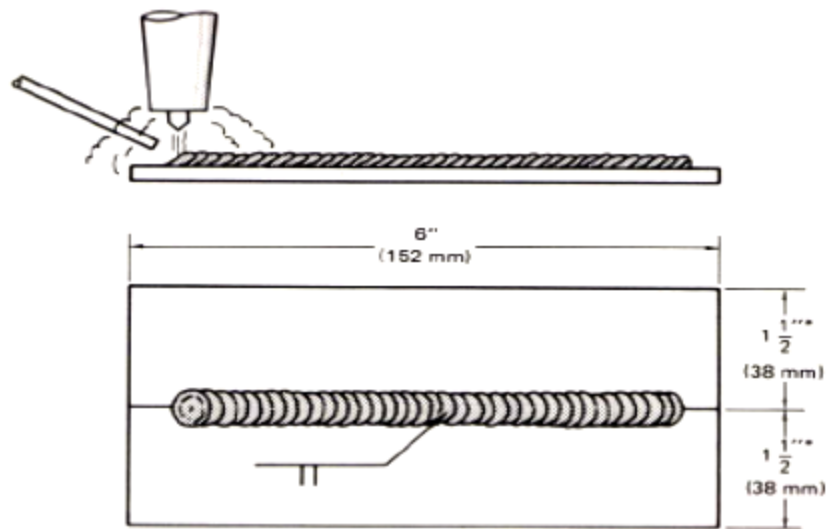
c : Gas Tungsten Arc Welding (GTAW)
